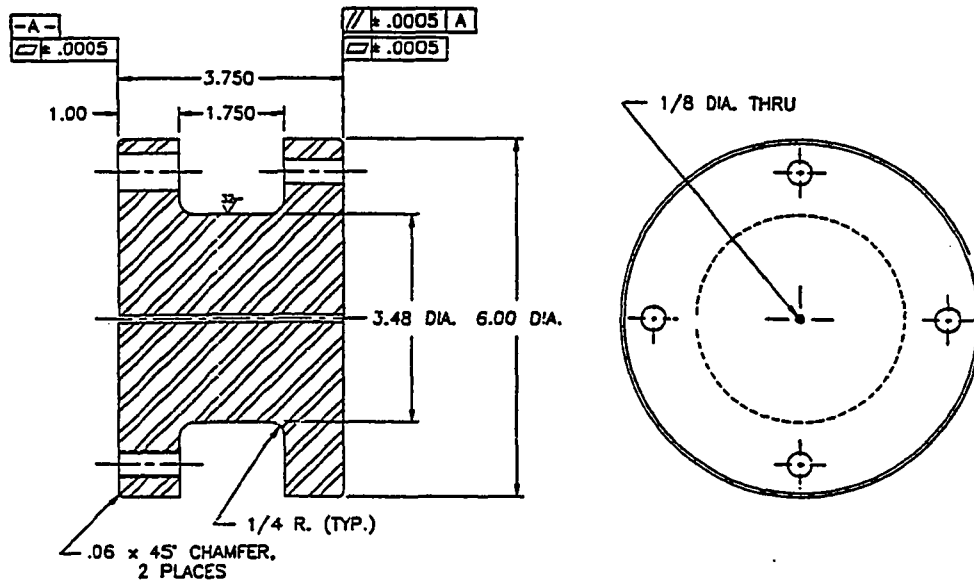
200 ton loadcell for measuring punch load in deep drawing tooling on Minster press.
